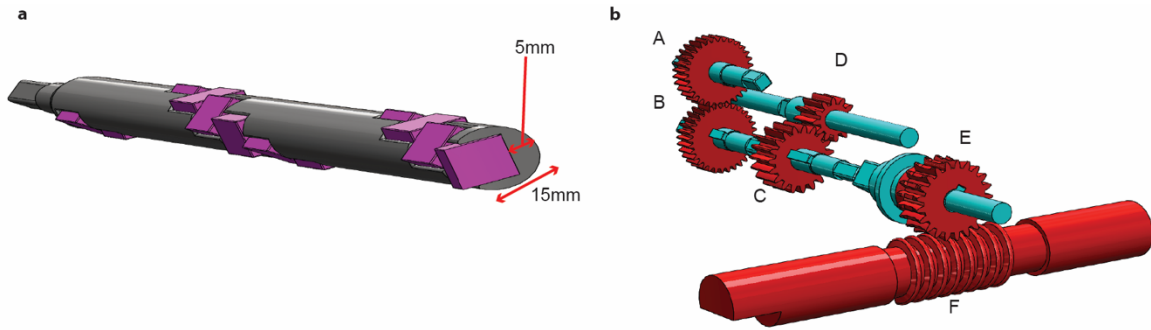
| a, Cross section of the shaft, showing the free thickness of the shaft. b, Gears design arrangement.
